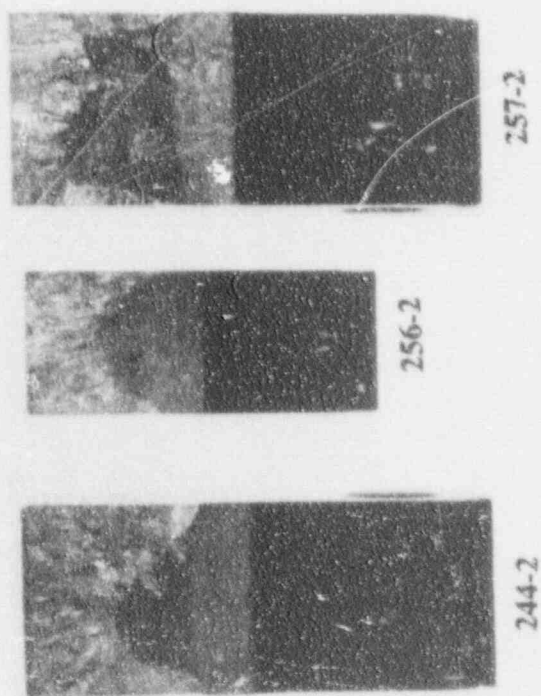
FRACTURE SURFACES OF SUB-SIZE J_{1C} SPECIMENS FROM 16-in. SWING ARMS
